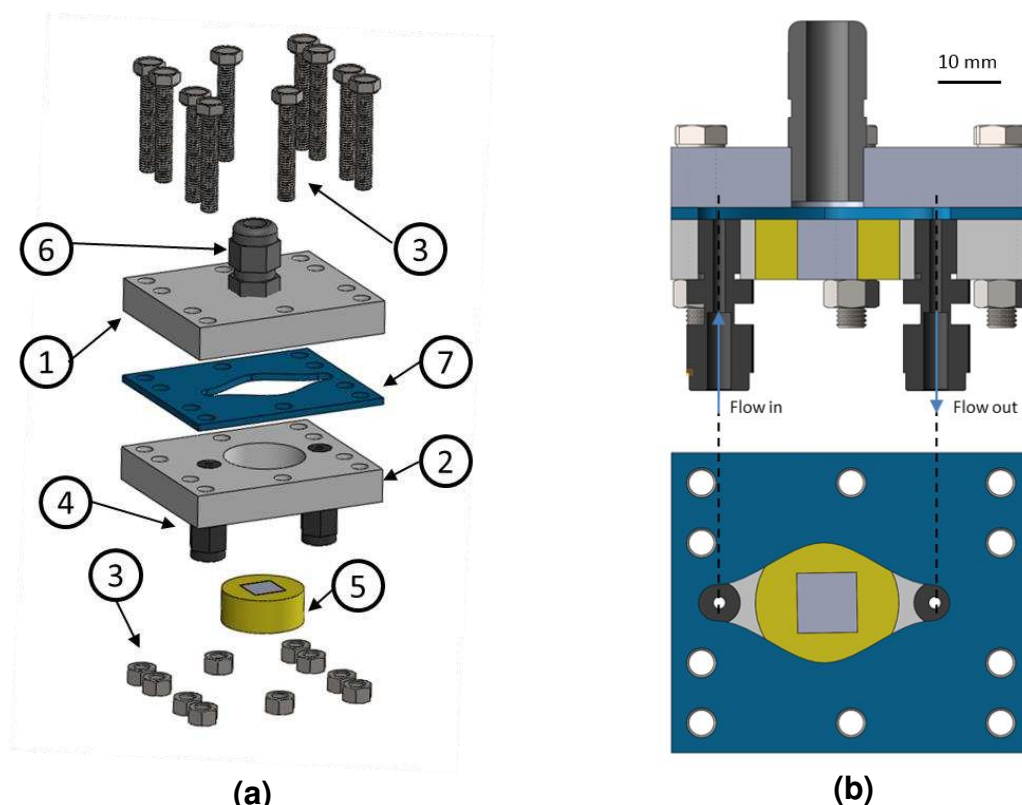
(a) Exploded and (b) cross-section view of the designed flow cell. The flow cell consists of (1) a top section, (2) a base (both manufactured from an acid resistant polymer), (3) M6 bolts, (4) inlet and outlet ports, (5) a carbon steel sample sealed into the cell using non-conducting resin, (6) a cable gland to position the Ag/AgCl reference and counter into the cell, (7) a custom cut gasket manufactured from Viton™ FKM.
